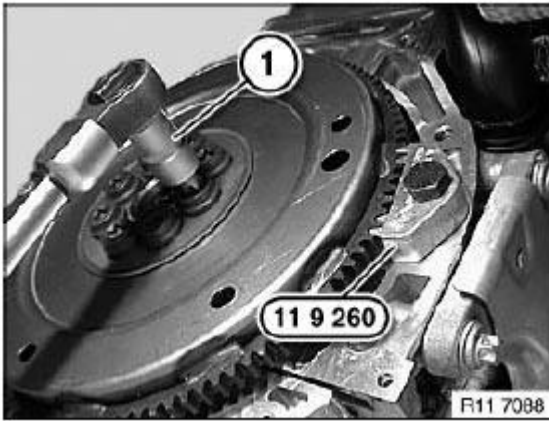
Mounting Flywheel Using Special Tool 11 9 260
